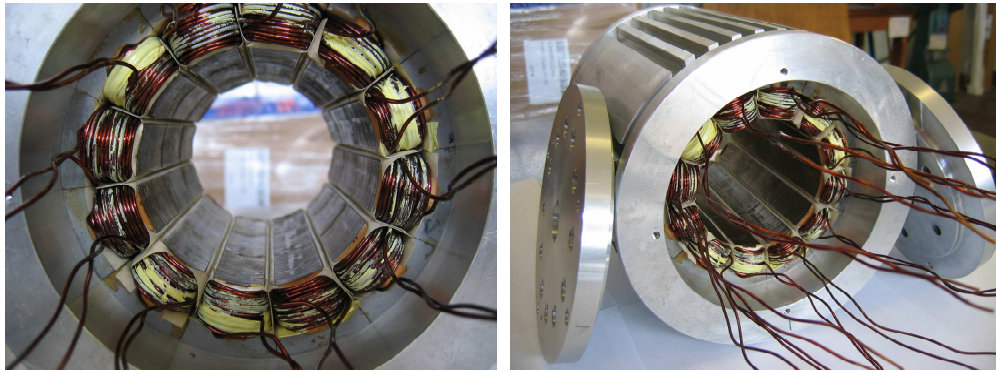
Frame and stator assembly - each coil connection brought out to have full flexibility in connection
